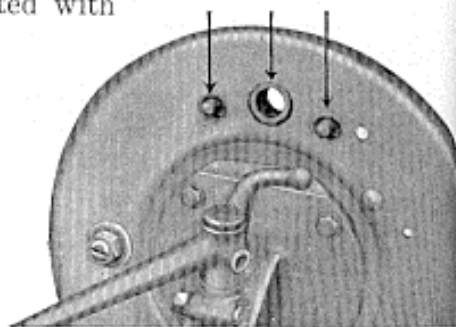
End arrows show slotted holes which permit centering of the operating cam
